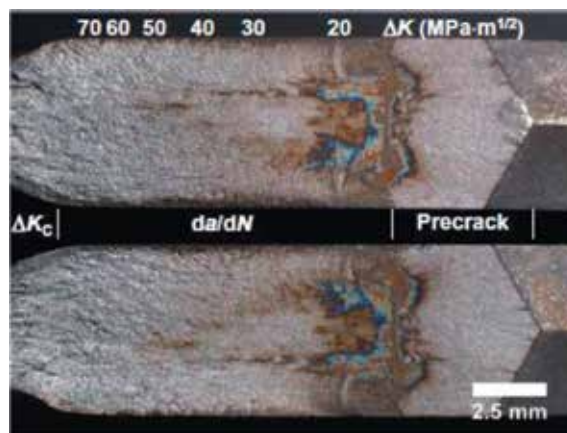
Macroscopic view of X52 fracture surface after testing in SFGE [36].
